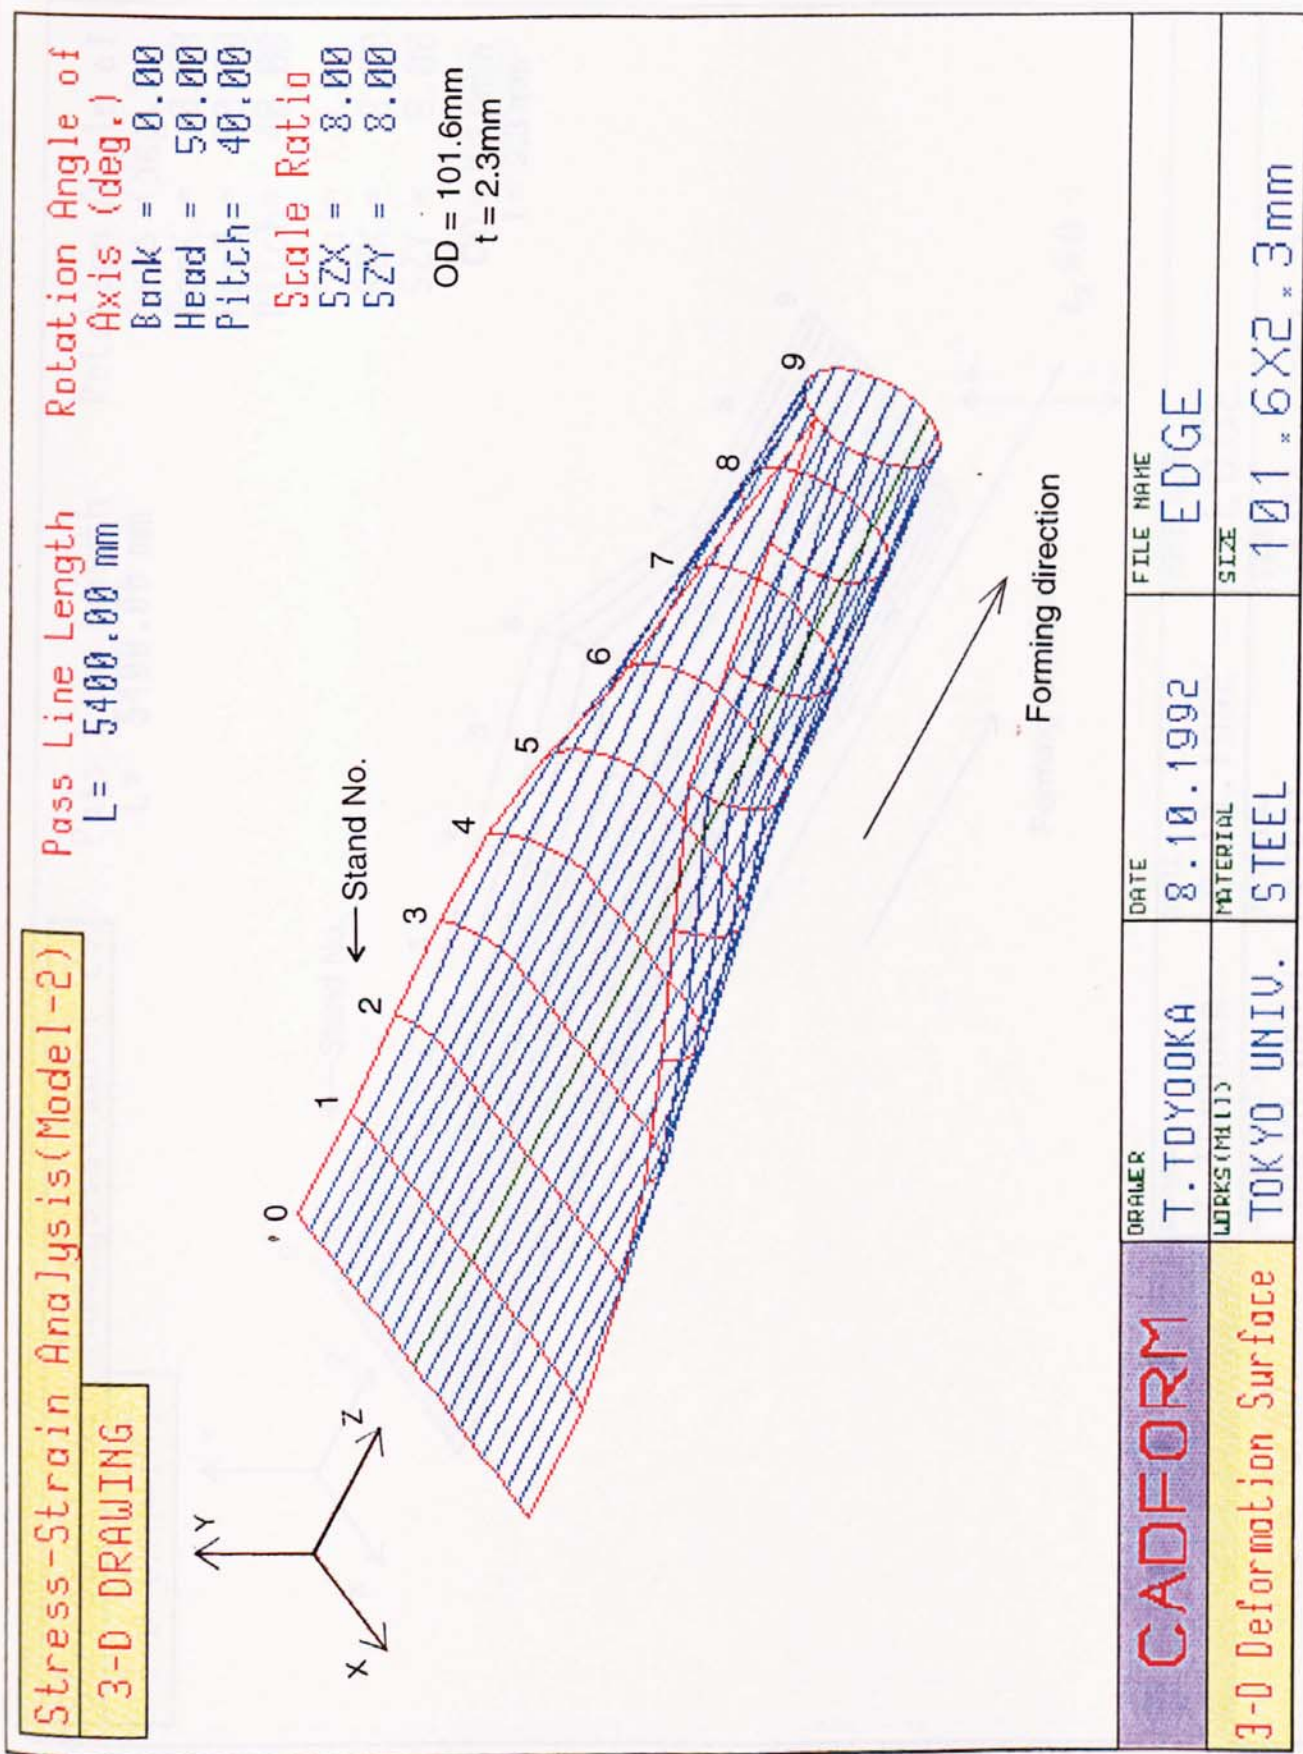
Computer graphic drawing of 3-D deformed surface of the strip for edge bending flower pattern
